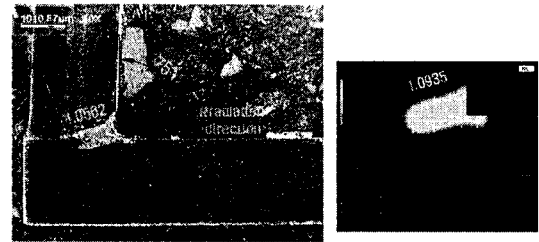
Molten zone size of fillet welded 3mm thick plate for each beam power
